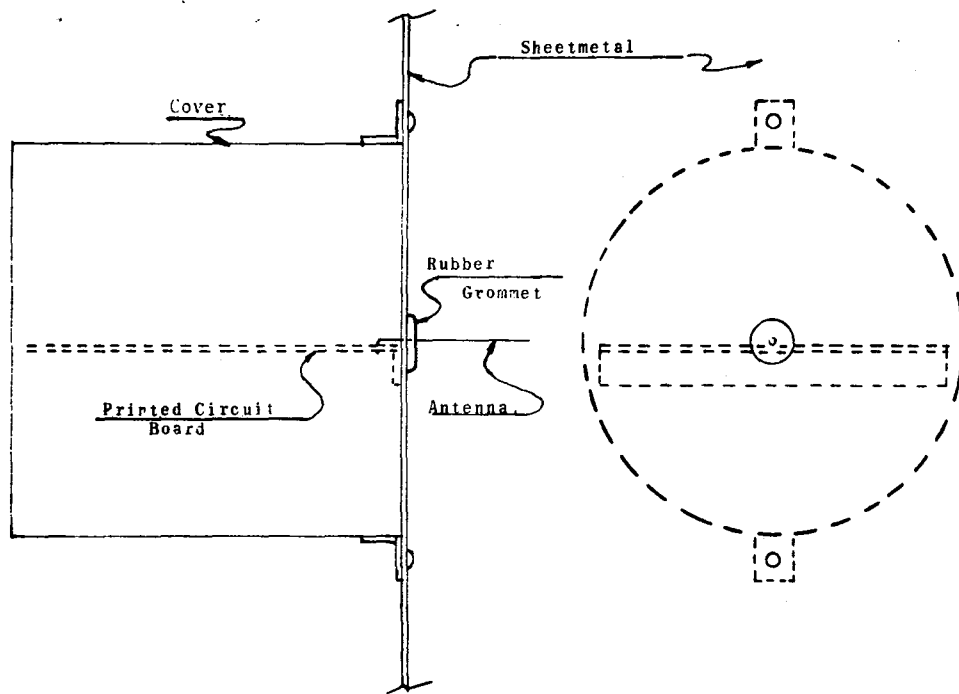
TRANSMITTER TEST FIXTURE SUBASSEMBLY FOR ANTENNA ENCAPSULATION
